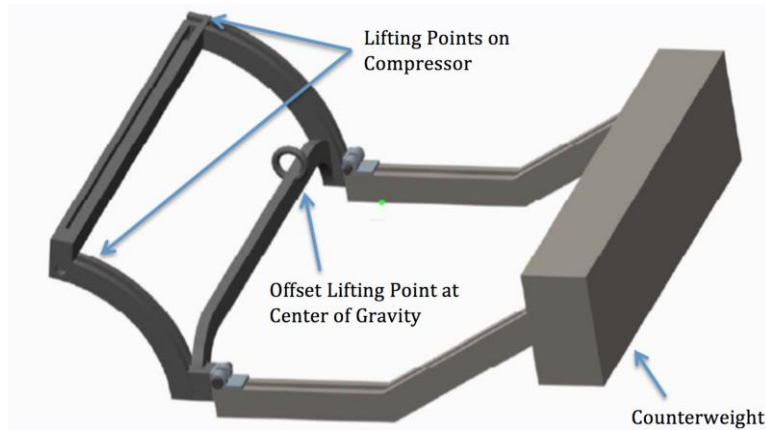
CAD Drawing of the Counterweight Lifting Bar Concept
